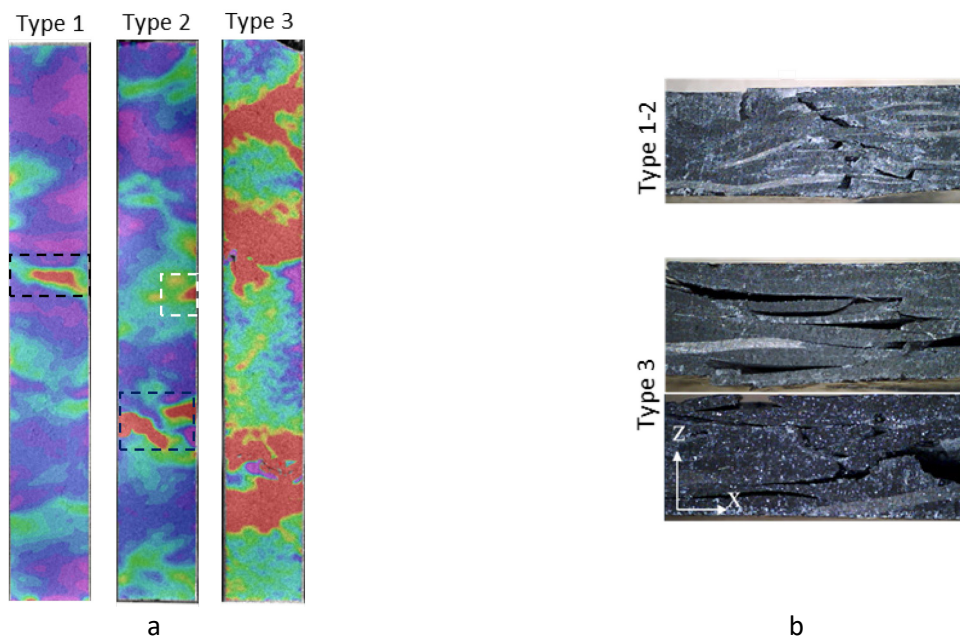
Fracture surfaces of the tensile specimens: a) strain map acquired with the DIC system; b) transversal fracture surfaces.
